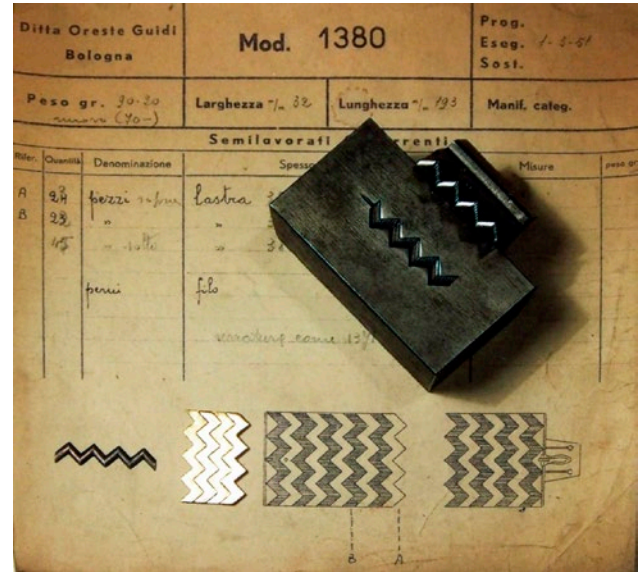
Technical sheet and its mould from Ditta Oreste Guidi.
